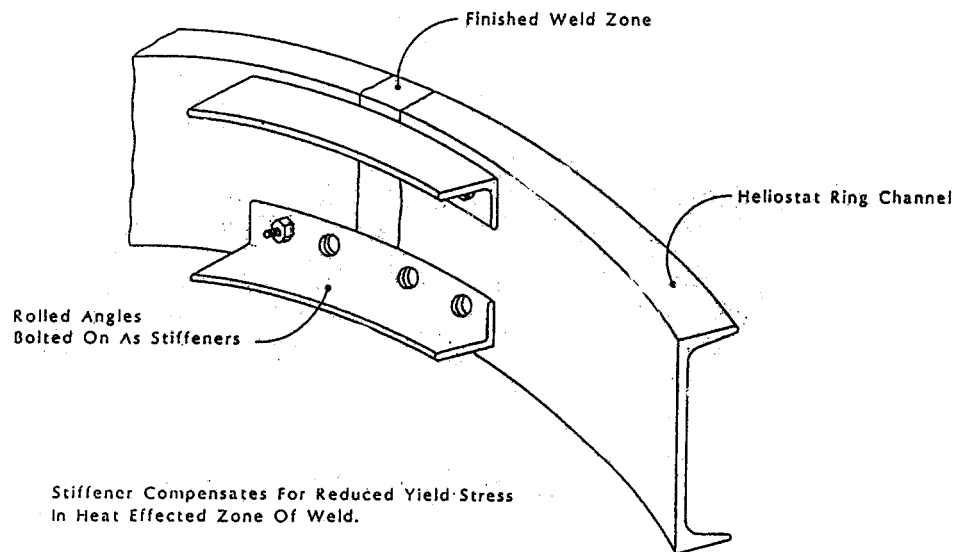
Heliostat Ring Stiffeners at Segment Splice Locations. The stiffeners were bolted in place to avoid any further weld heat effects.
